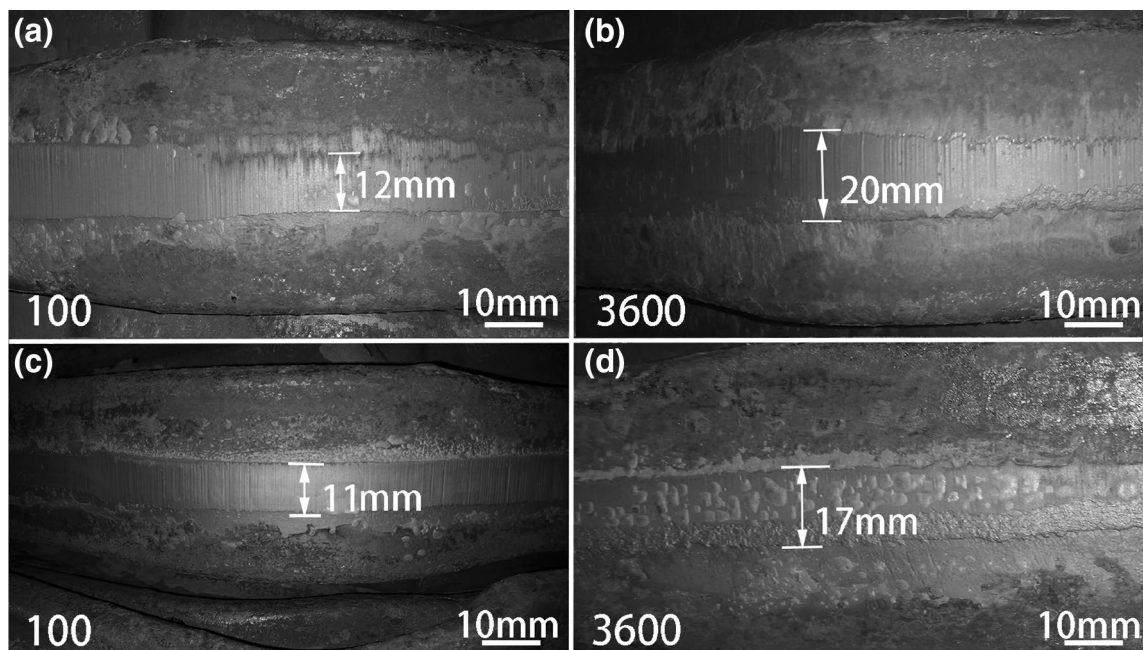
Development trend of the cut edge width on curved forging pieces. a, b Untreated mold and c, d laser melting mold
